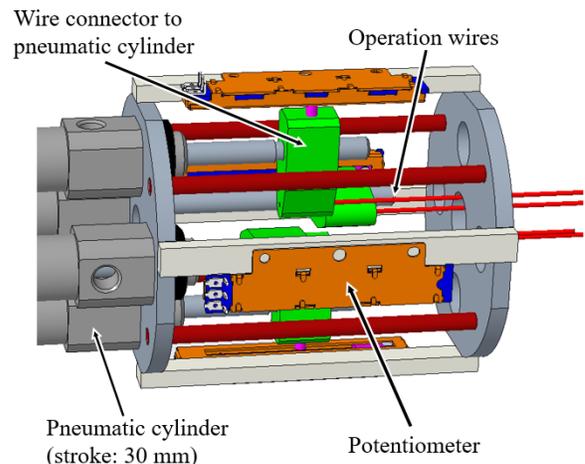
Driving section details. The driving section consists of four pneumatic cylinders for bending the joints in two directions and one pneumatic cylinder for gripper opening and closing. Note that this paper focuses to realize the bending motion as our first prototype, and the rotation motion of the forceps tip will be realized in our future work.
